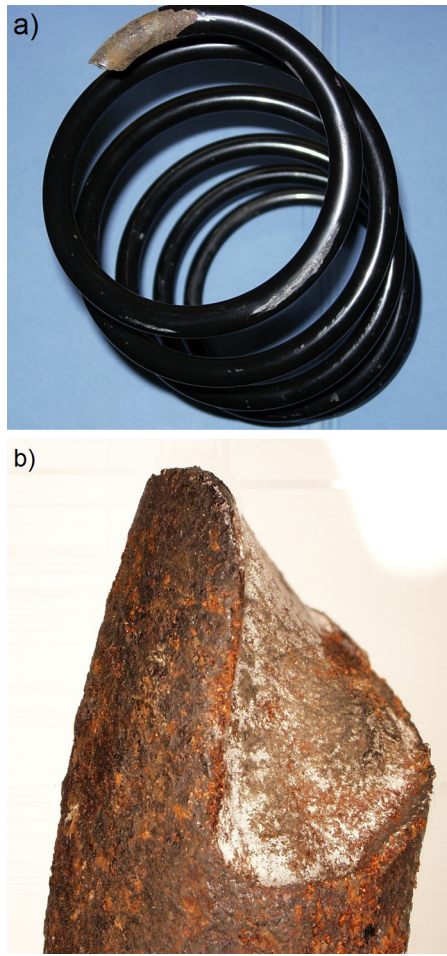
Damaged motor-car coil surface (a) and corroded fracture surface (b).
